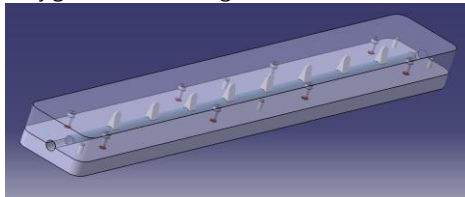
Camshaft Jig Assembly with centering dowels and bolts.
